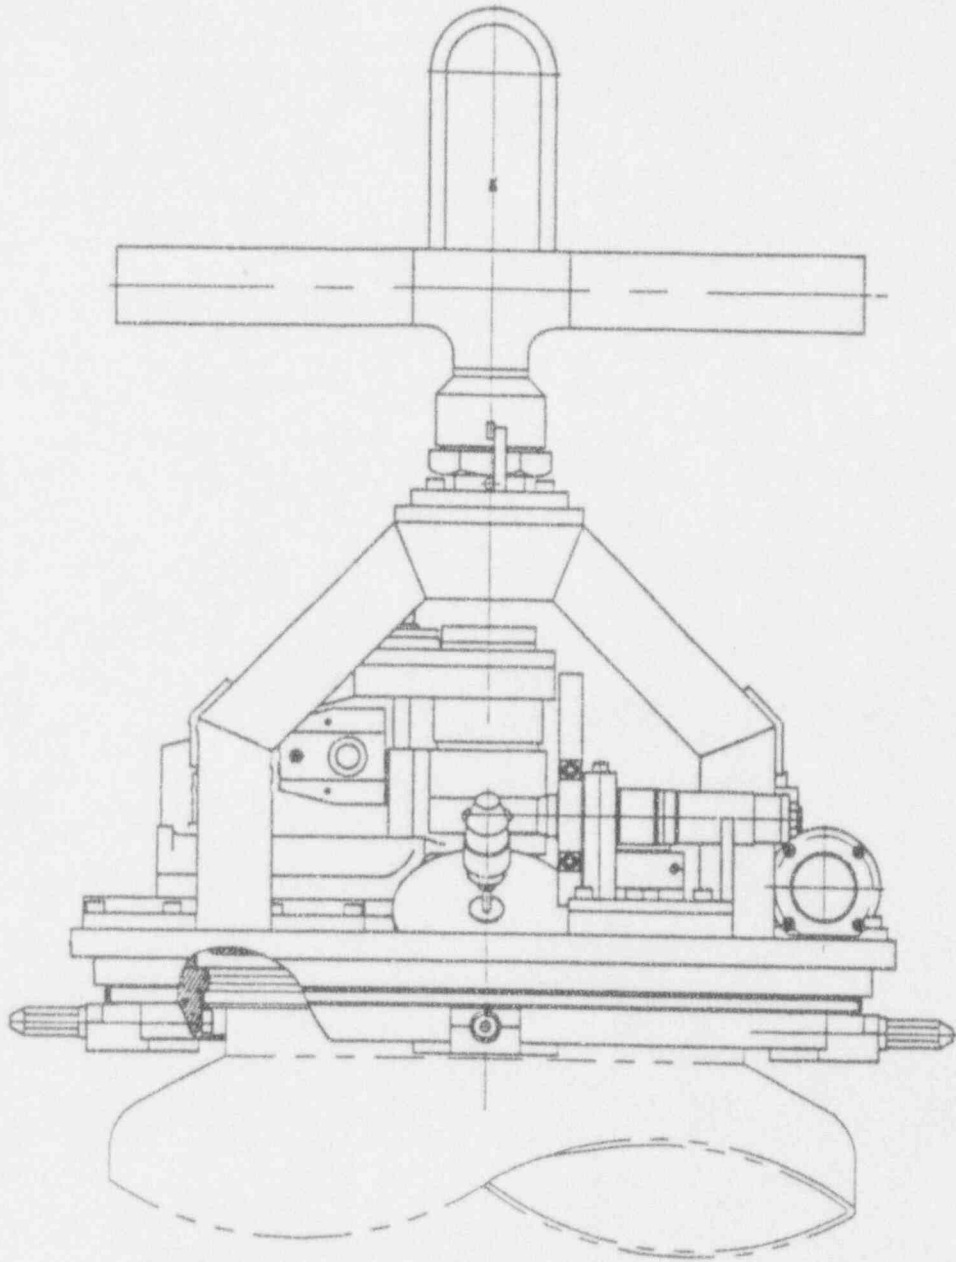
Flange Conditioning Tool on a Canister, Elevation View
